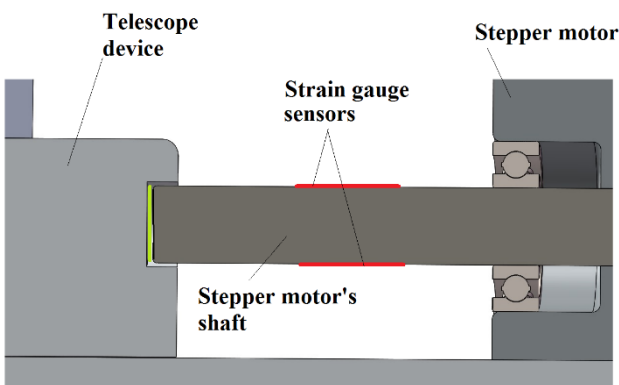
Location of strain gauge sensors on the stepper motor shaft
